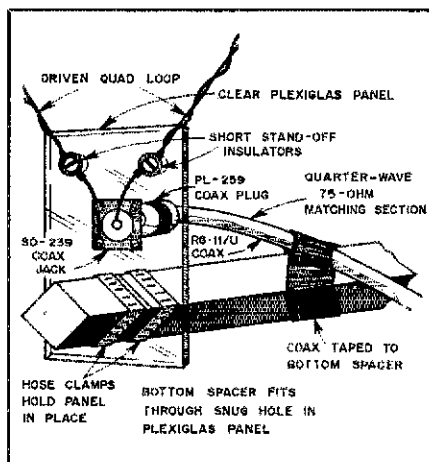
The coaxial-cable feed-point fixture is made of clear Plexiglas and slips onto the bottom spacer.
